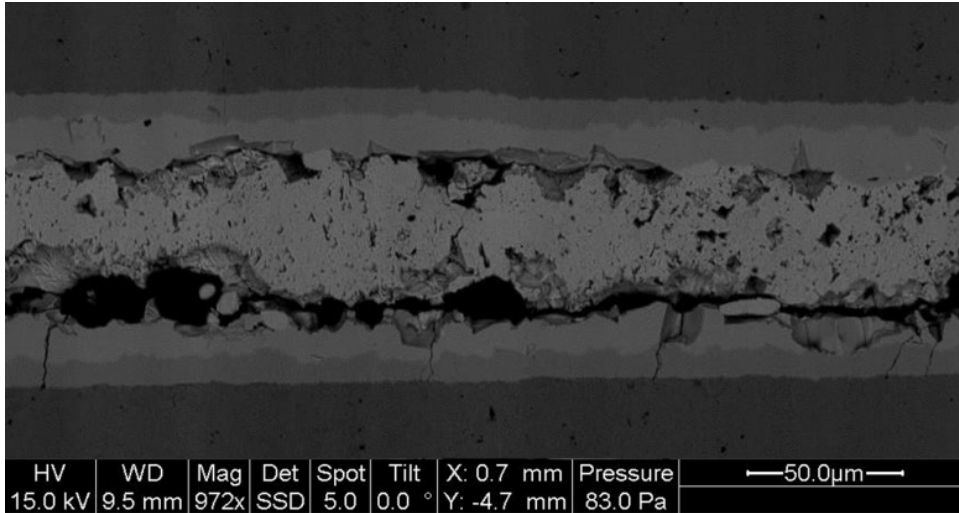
Fracture behavior of the Sn3.5Ag solder joint aged for 500 hours after 1000 drops of 1500G acceleration
